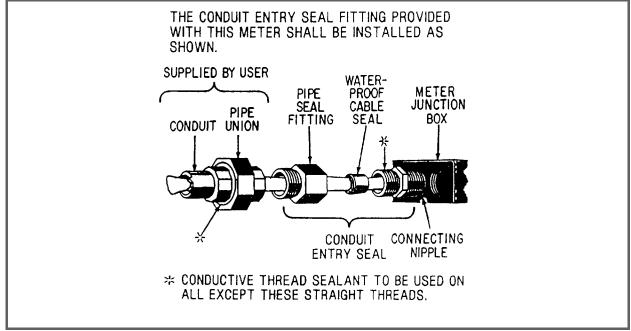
CONDUIT ENTRY SEAL INSTALLATION
